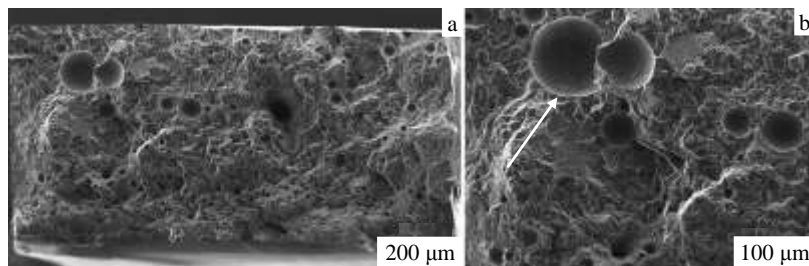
Fatigue fracture micrographs of welded joint of 7075-T6 aluminum alloy
